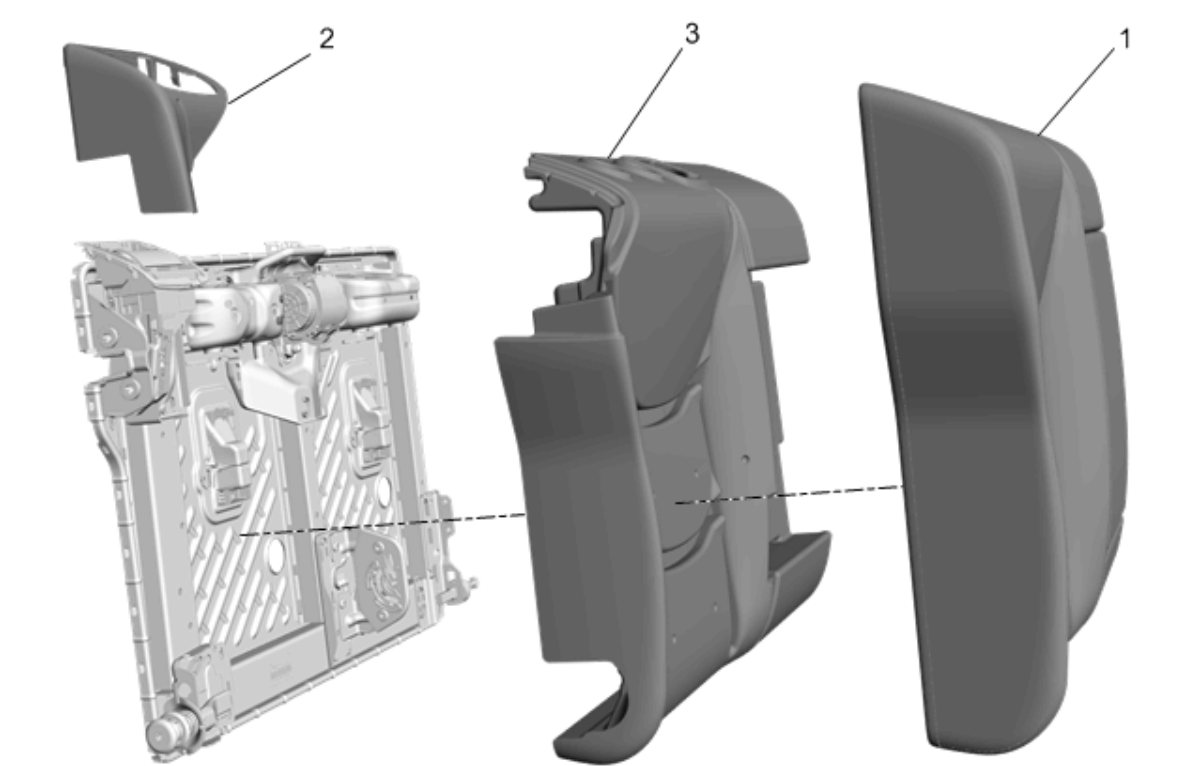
Rear Seat Back Cushion Cover and Pad (60%)
